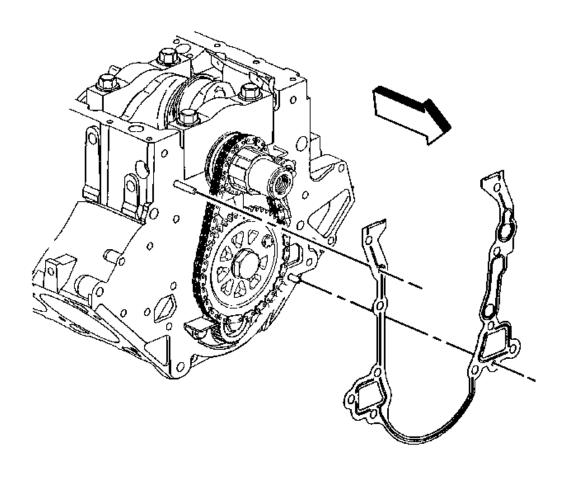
Engine Front Cover Gasket Courtesy of GENERAL MOTORS CORP.
